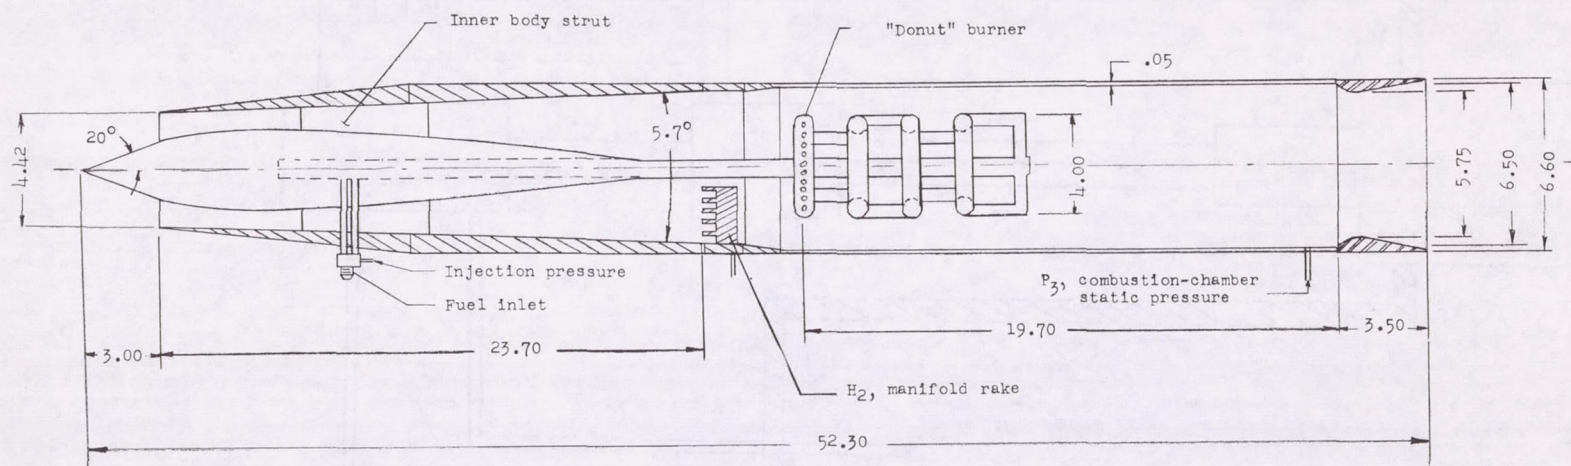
Section view of ram-jet engine. All dimensions in inches.
